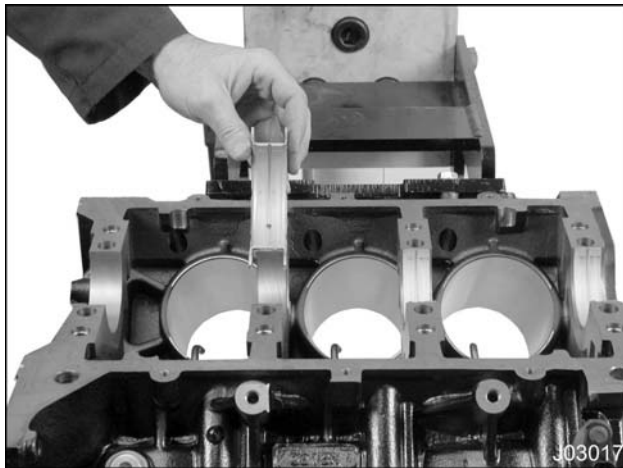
Upper crankshaft main bearings (thrust bearing shown)
